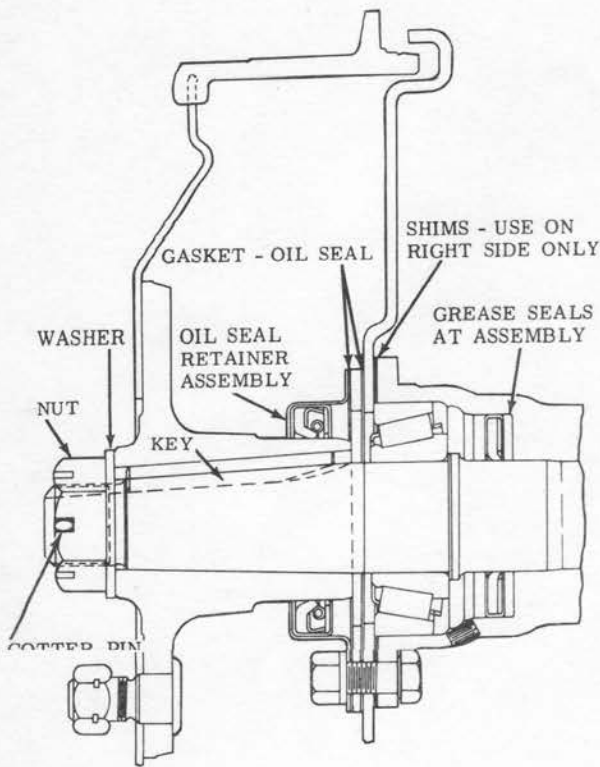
Rear Wheel, Hub, and Brake Drum Assembly
